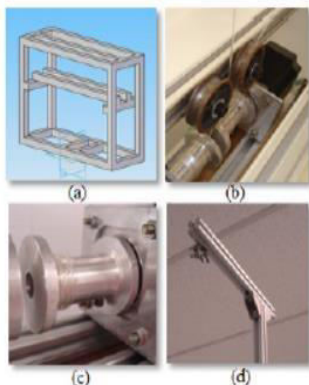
a) Chassis design b) Guiding pulley c) Spindle d) Static support point
